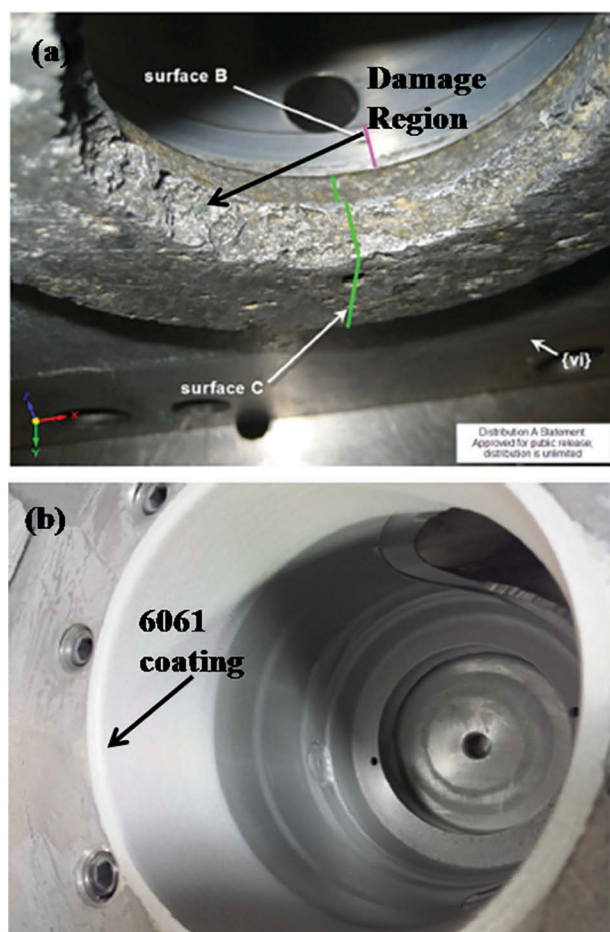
(a) Exfoliation and pitting corrosion damaged Al navy valve actuator internal bore (b) after repair and refurbishment with a coating deposited by cold spray technique
